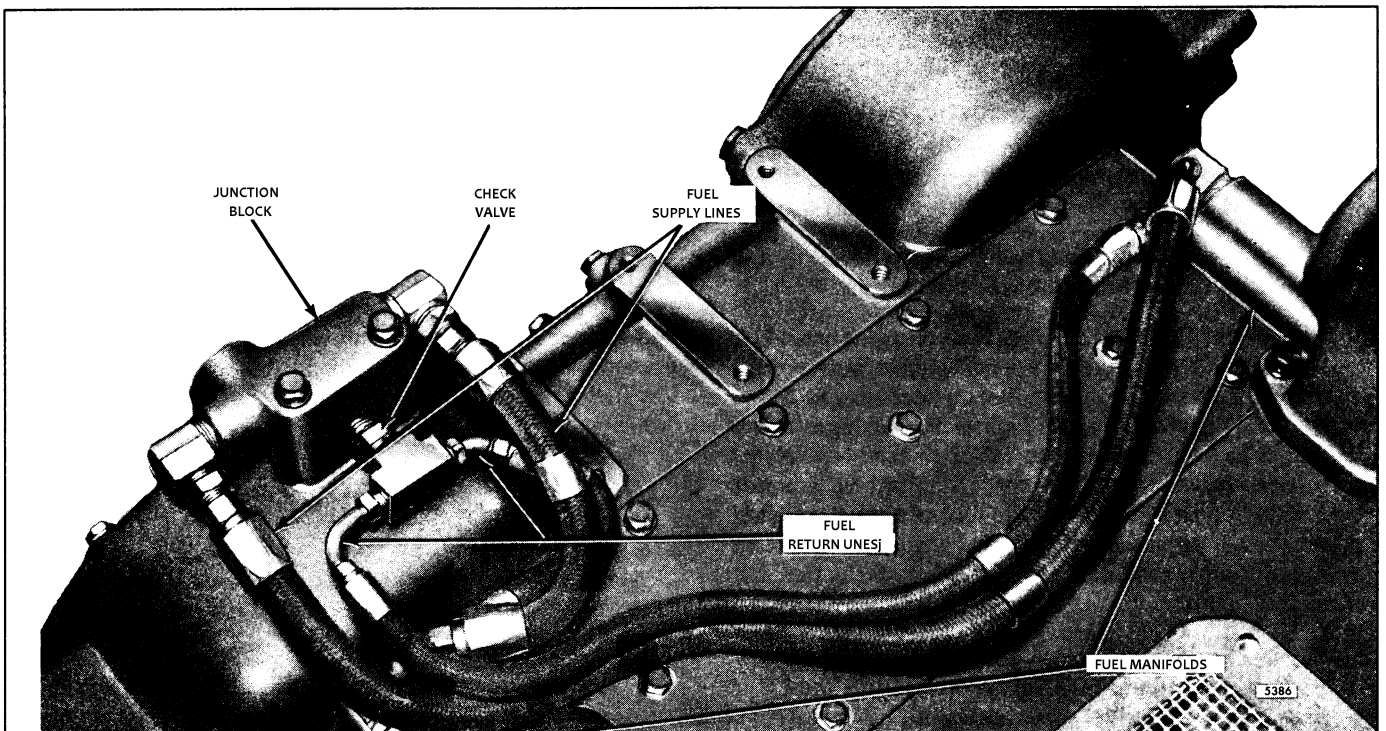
Fuel Manifolds and Piping (Early Engines)
